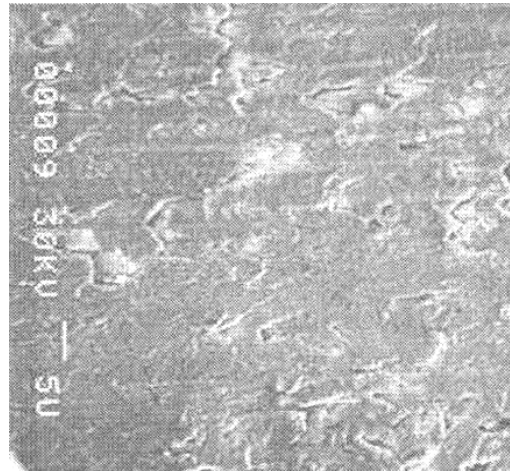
Unacceptable Smeared surface -SEM picture (Carbide tool, C-7)
